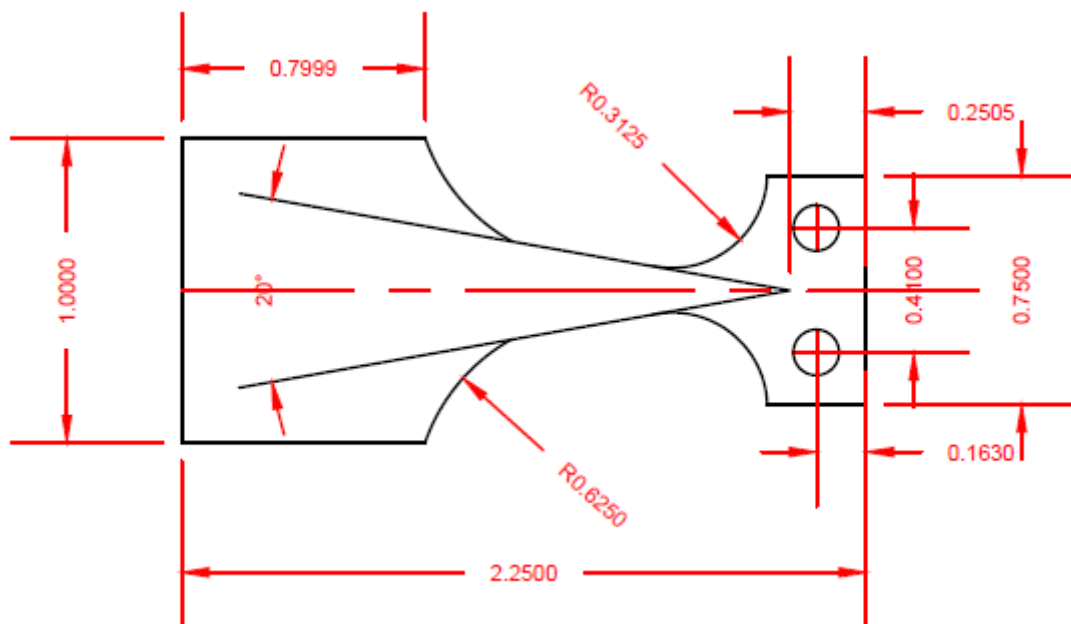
Sketch of specimen type-2 (all dimensions are in inches).
